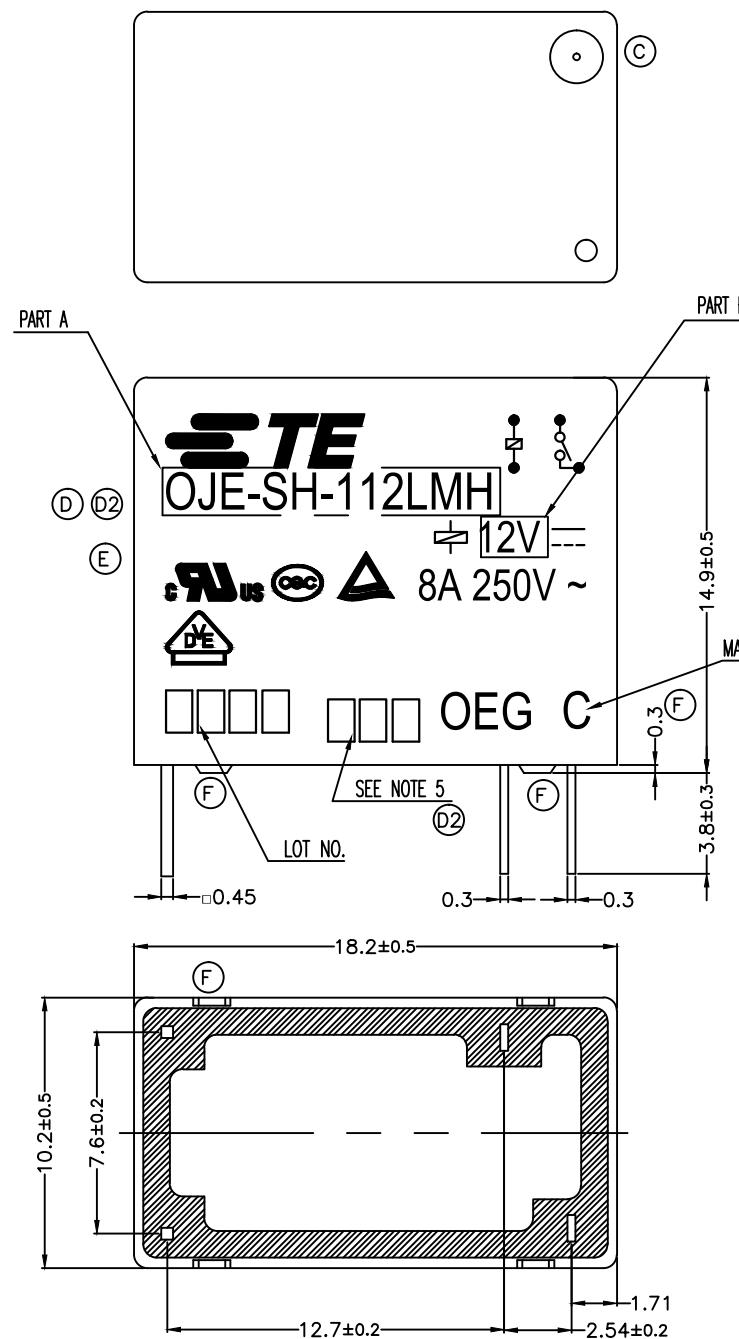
FIGURE FOR PRINTED CIRCUIT BOARD PROCESSING
